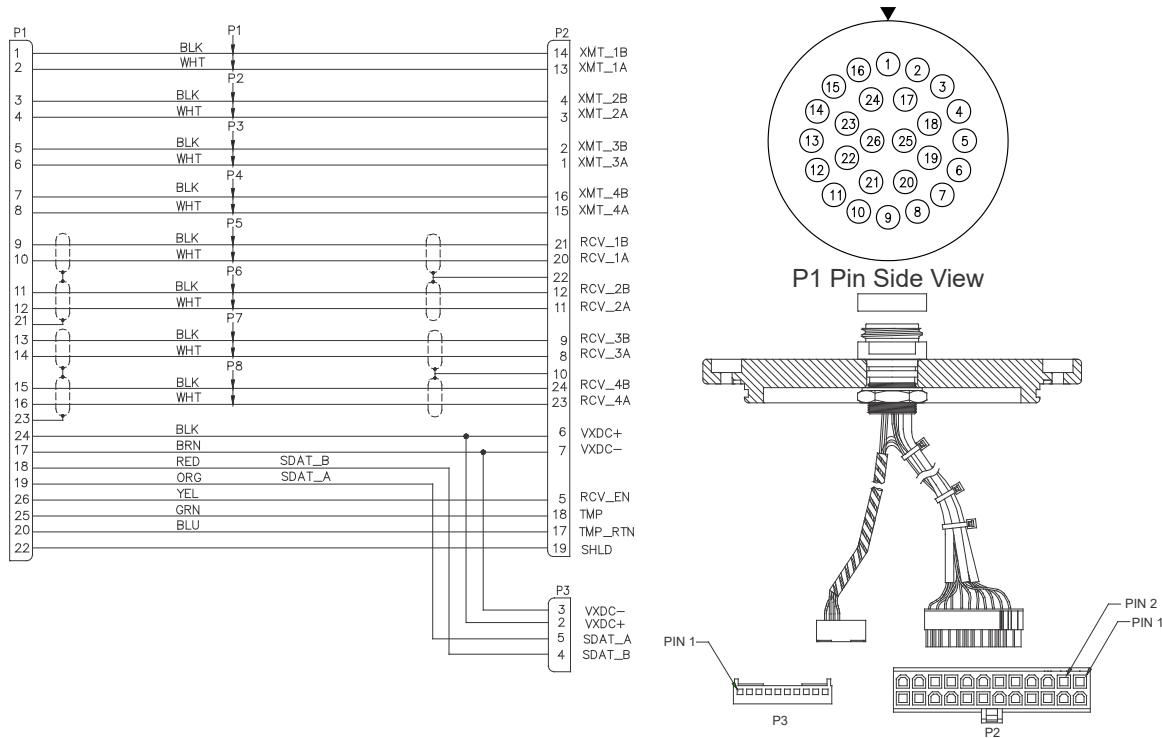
End-Cap Pin-Out and Internal I/O Cable Wiring
